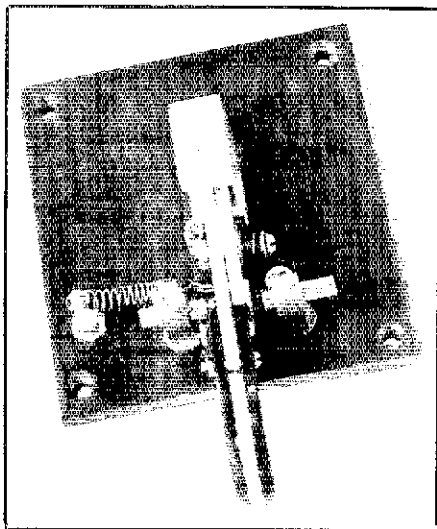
The final assembly details of a keyer paddle made by Arnold Harvey, W8OJN.
